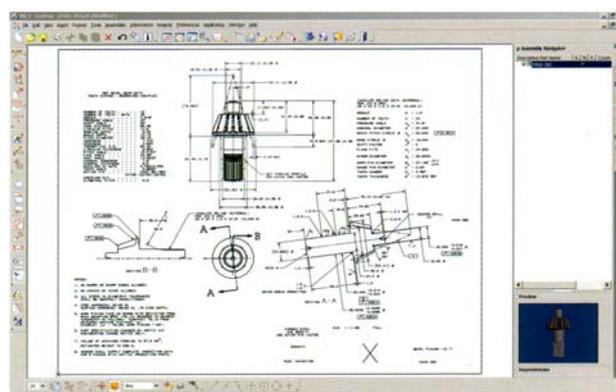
Technical drawing of a gear pinion (Pipes 2007)
